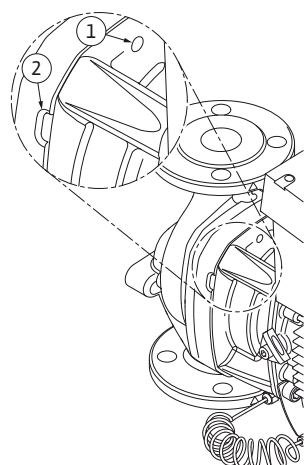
Threaded holes and slots for pressing off the motor impeller unit from the pump housing
